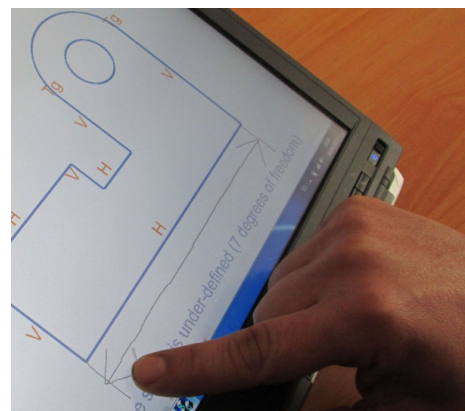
Inking mode operation: drawing a dimensional constraint.
